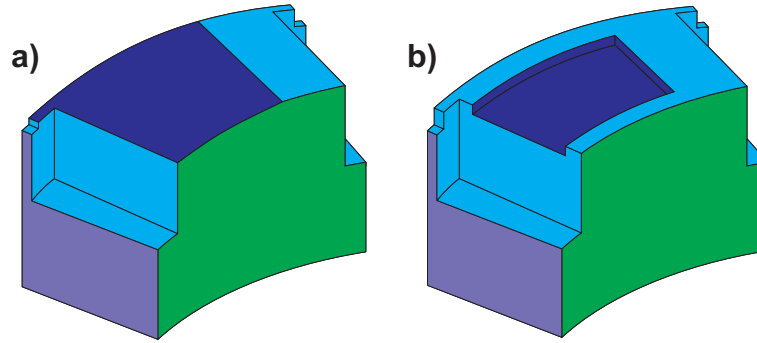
3D representation of the a) tapered-land and b) pocket bearing configurations.
